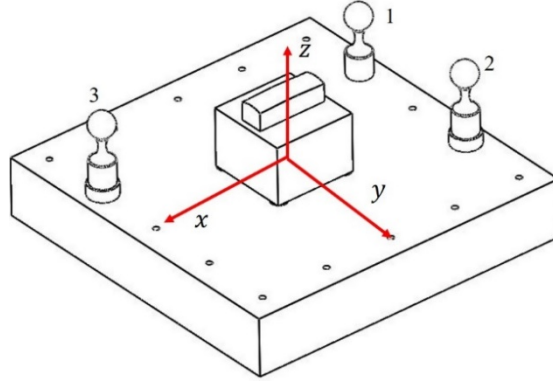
Quadrate fixture and the fiducials with the pre-processed workpiece.
